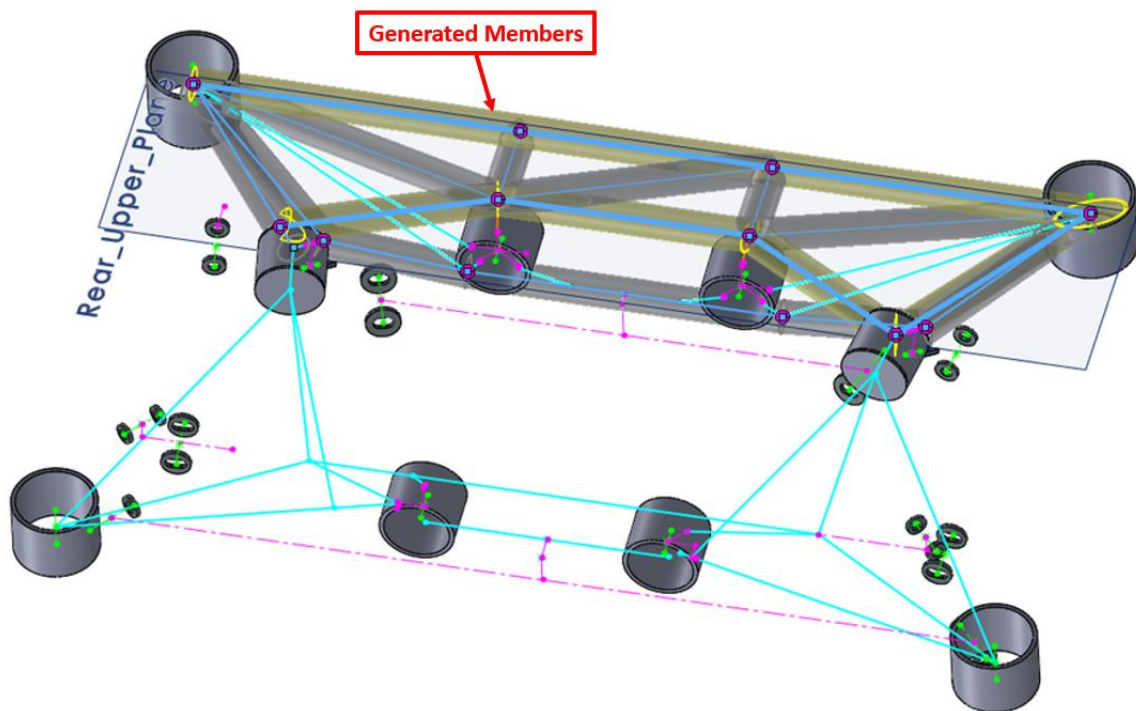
Using the SolidWorks weldment tool, with the generated members in yellow
